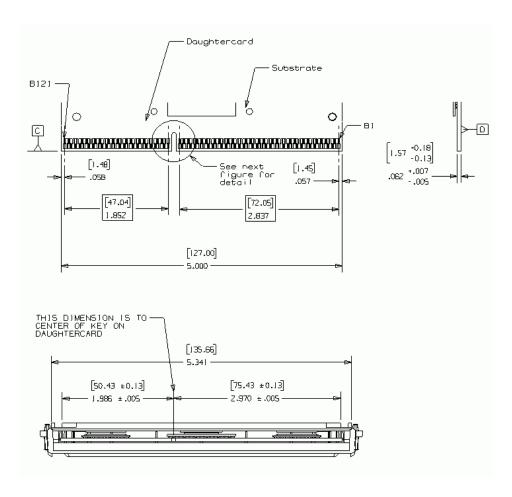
Card Edge Dimensions—Thermal Plate Side View
